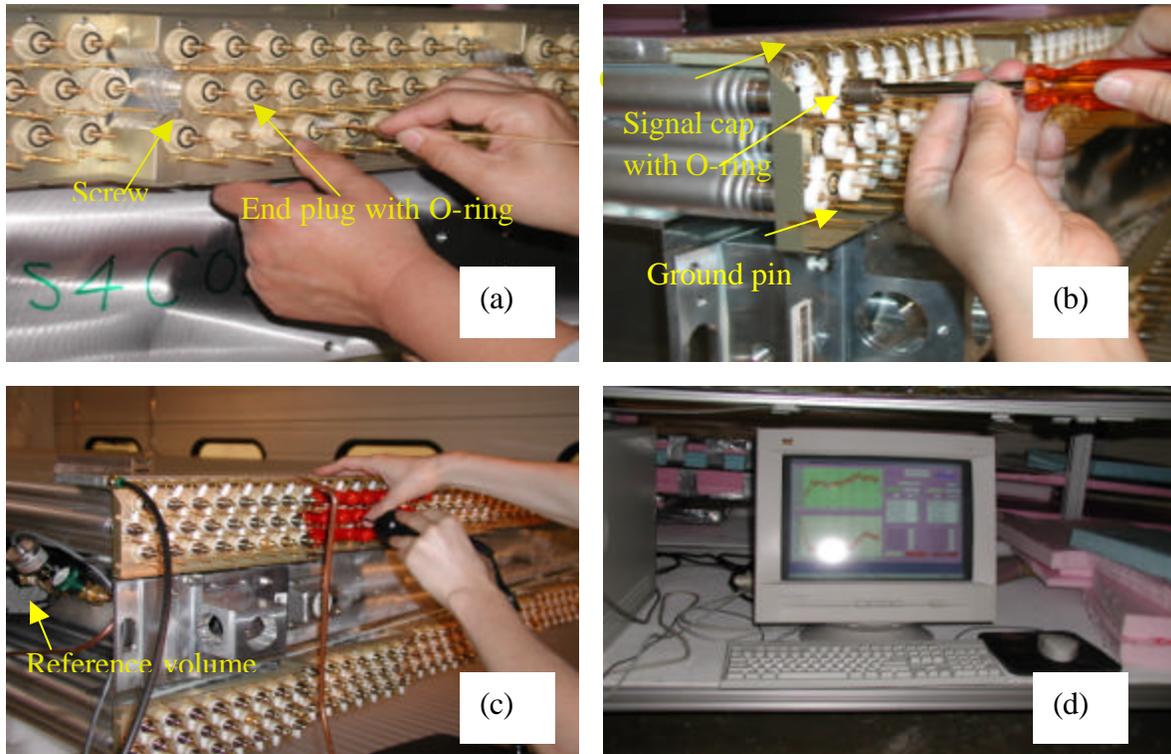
(a) Installation of Faraday cage and cleaning of O-rings on endplugs. (b) Installation of gasbars onto chamber. (c) Leak checking. (d) DAQ system to certify the chamber. Chamber pressures, differential pressures and temperature from 16 T sensors (6 for each multiplayer, and 2 for each reference volume) are recorded every 5 minutes.
